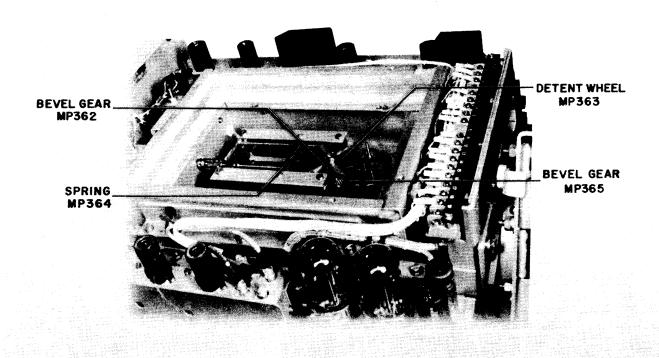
A. Radio Frequency Oscillator O-581/WRT-2, Oven Gear Train Disassembly,
